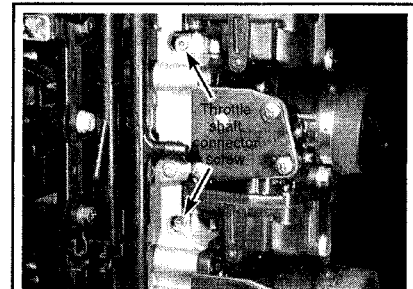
Throttle shaft connector screws-V6 shown (V4 uses one on each side)
